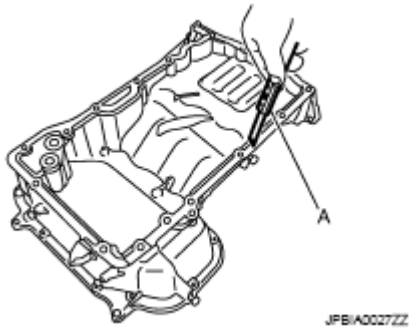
Using Scraper To Remove Old Liquid Gasket From Mating Surface Of Lower Cylinder Block
